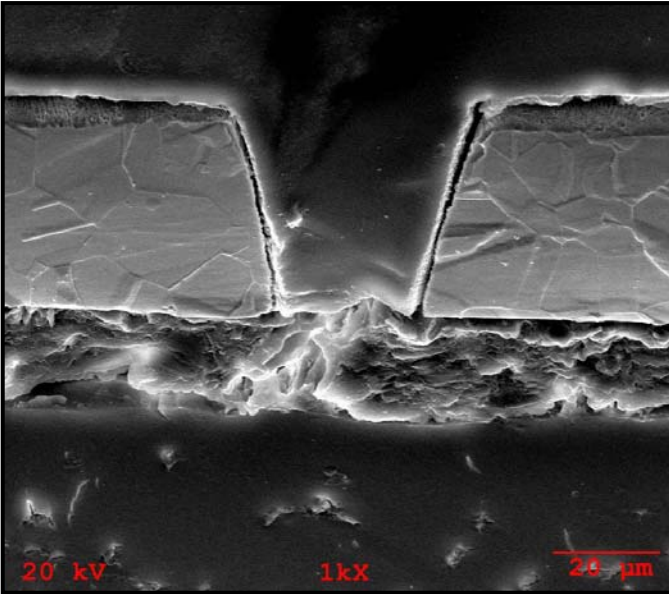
SEM image (side view) of hole machined in 316 stainless steel. (Material below sample is epoxy used in SEM preparation).
